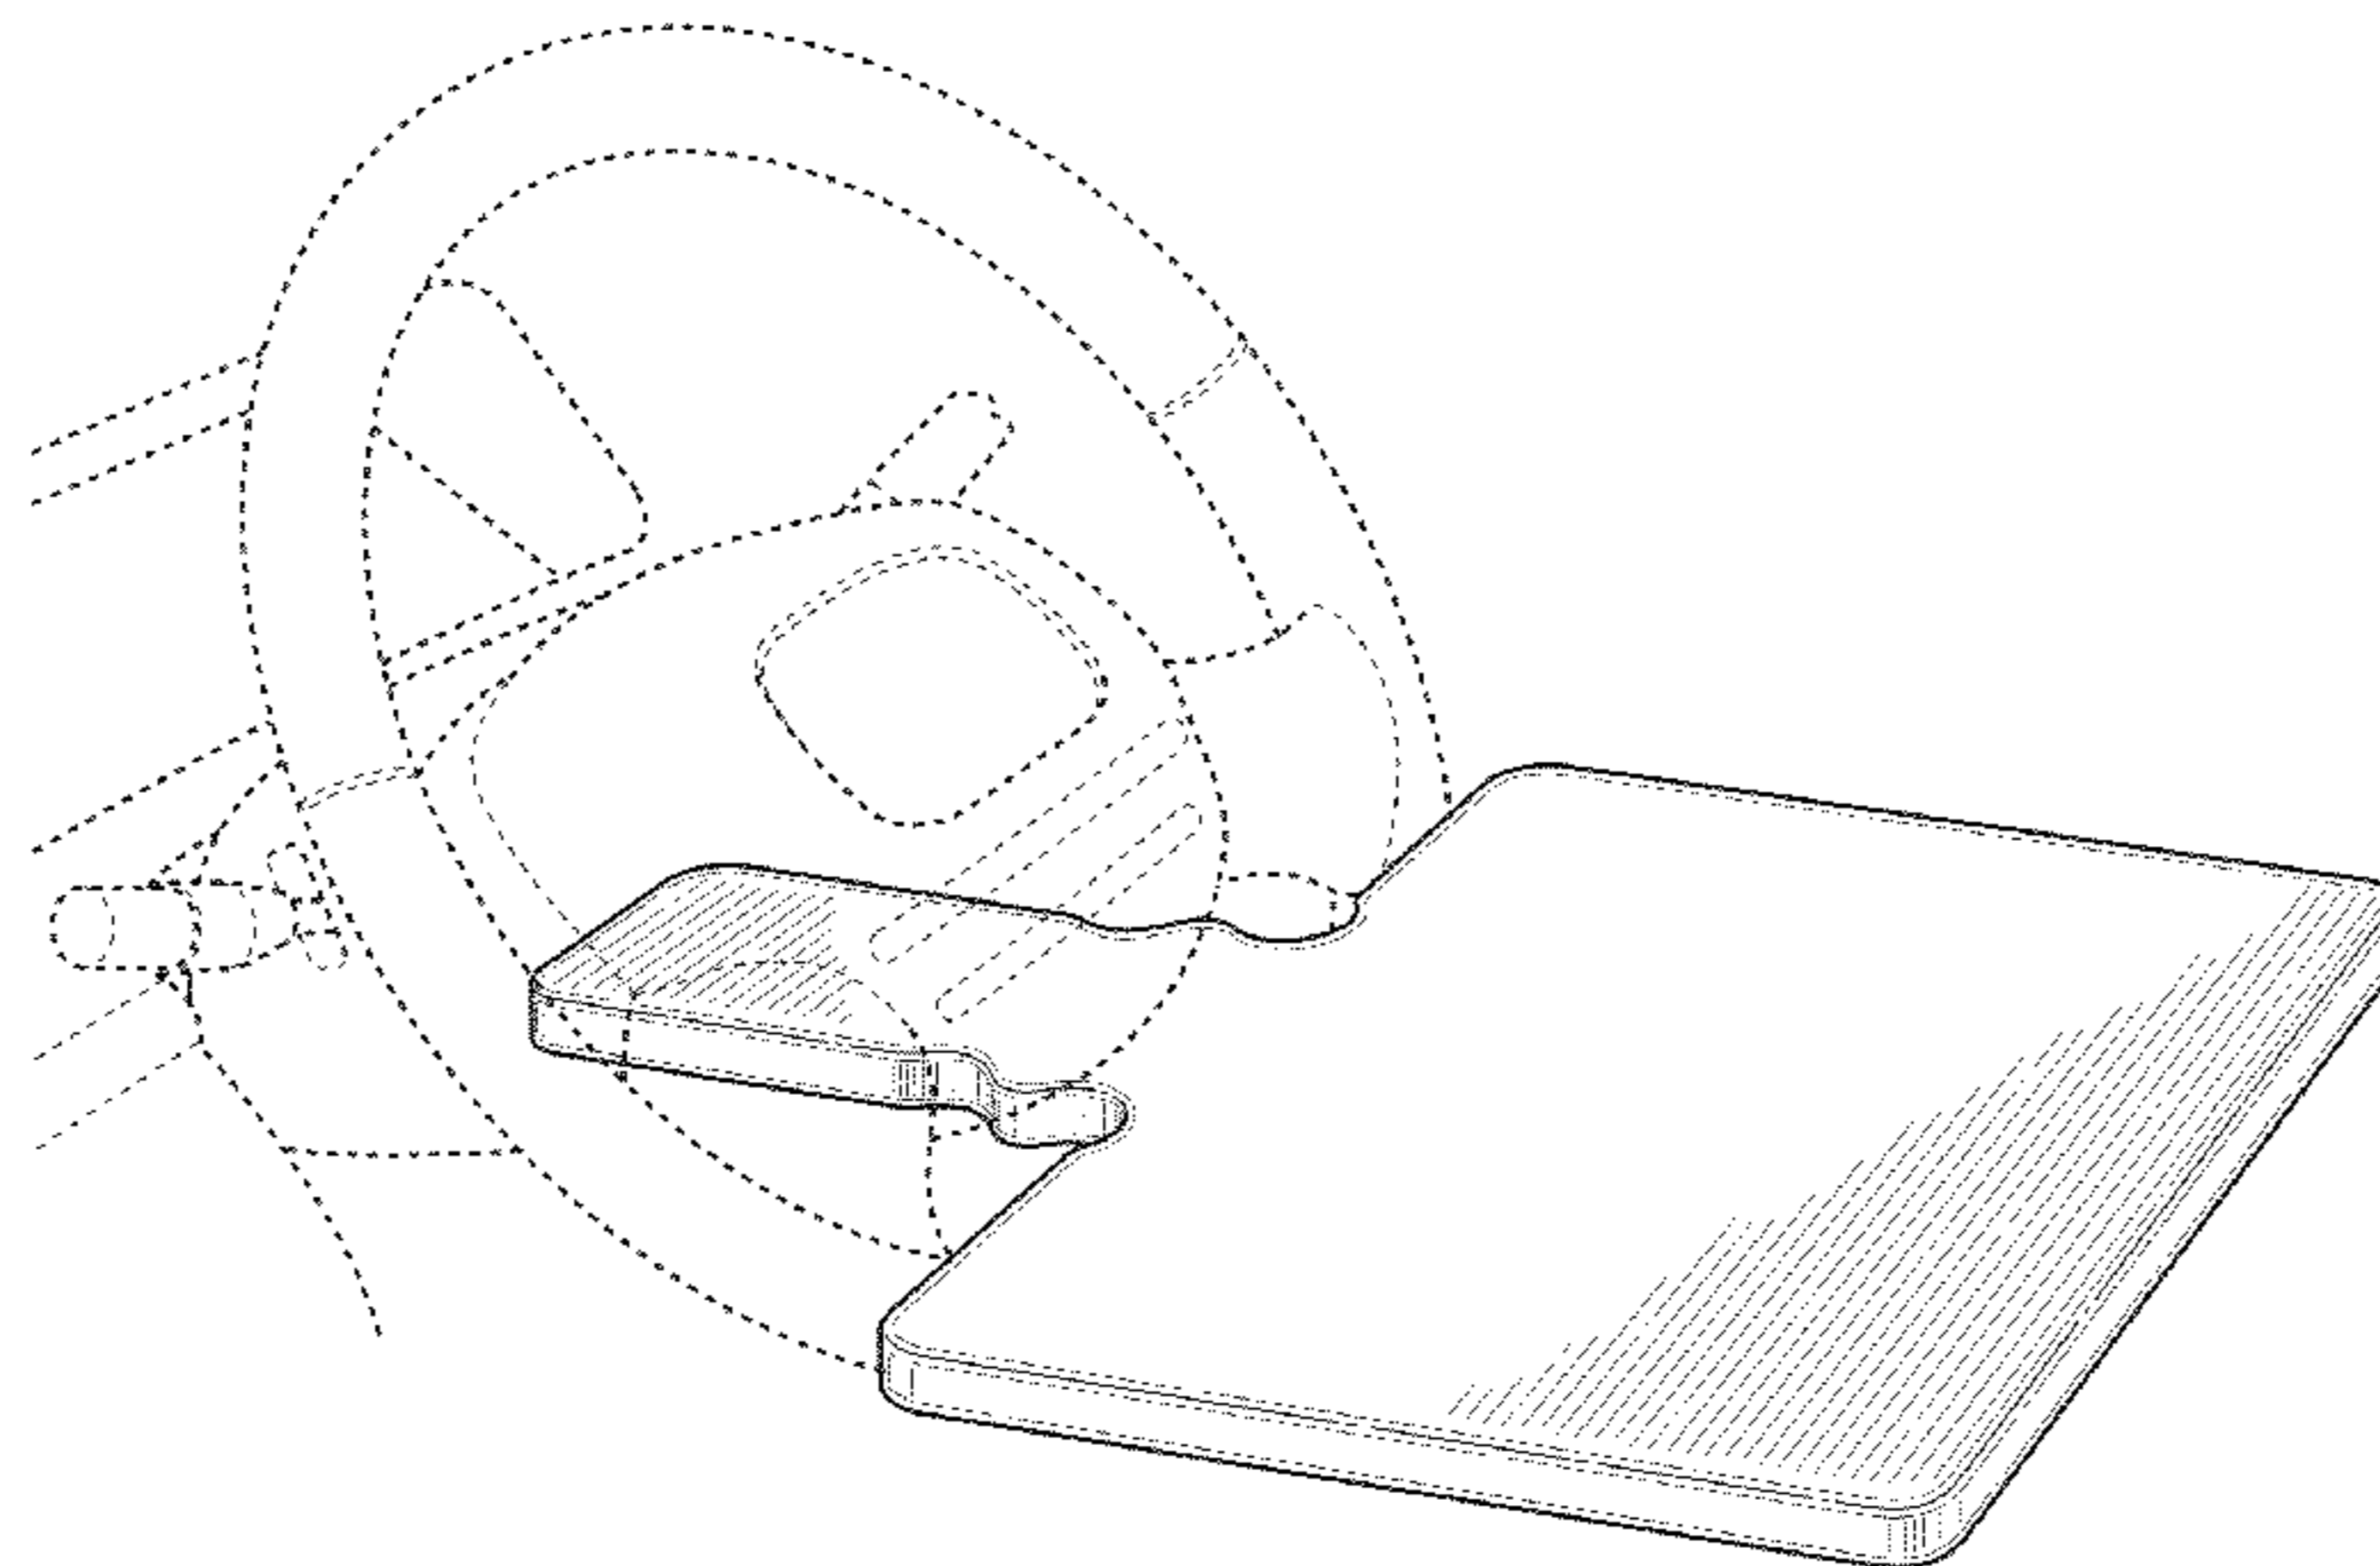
shows a second view of the steering wheel tray of the present invention.
